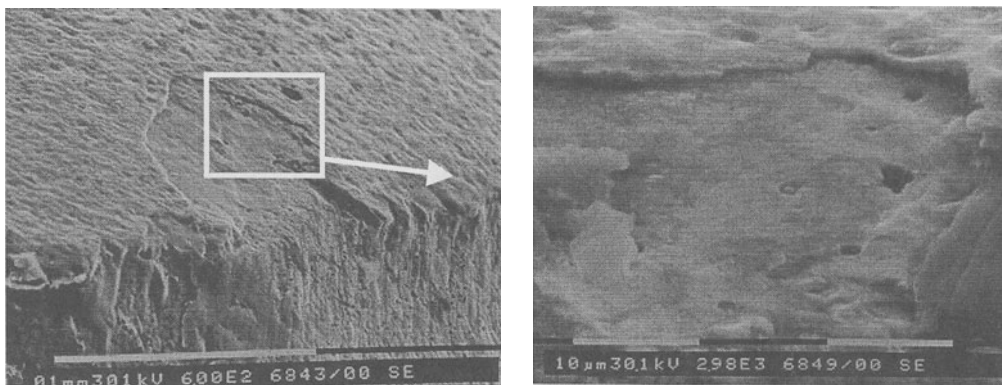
Wear on a teeth: detachment mechanism of the coating-600X
